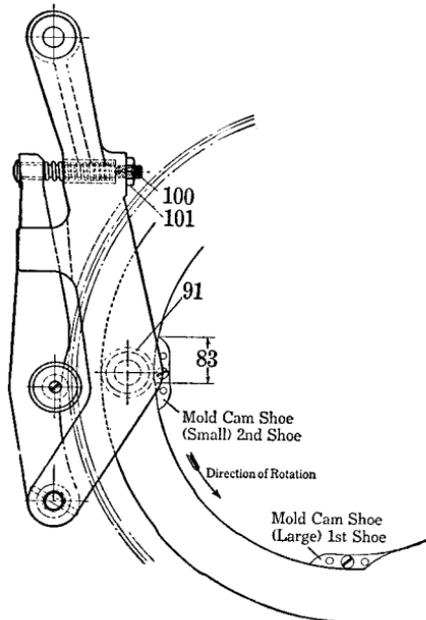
View of the mold cam and driving gear when standing at right-hand side of machine, showing the resilient mold cam lever in position. For machines having this type of cam lever, adjustment for the proper clearance between face of mold and matrices when justification takes place is made by screw 100.
